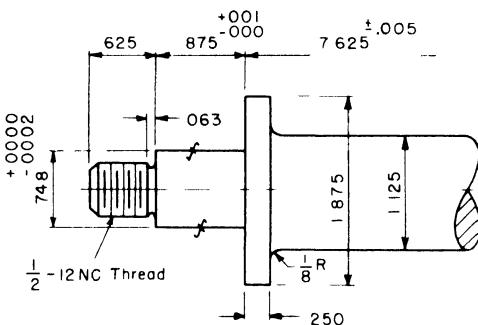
Drawing of piece-part showing some of the dimensions with which the inspector is concerned.
